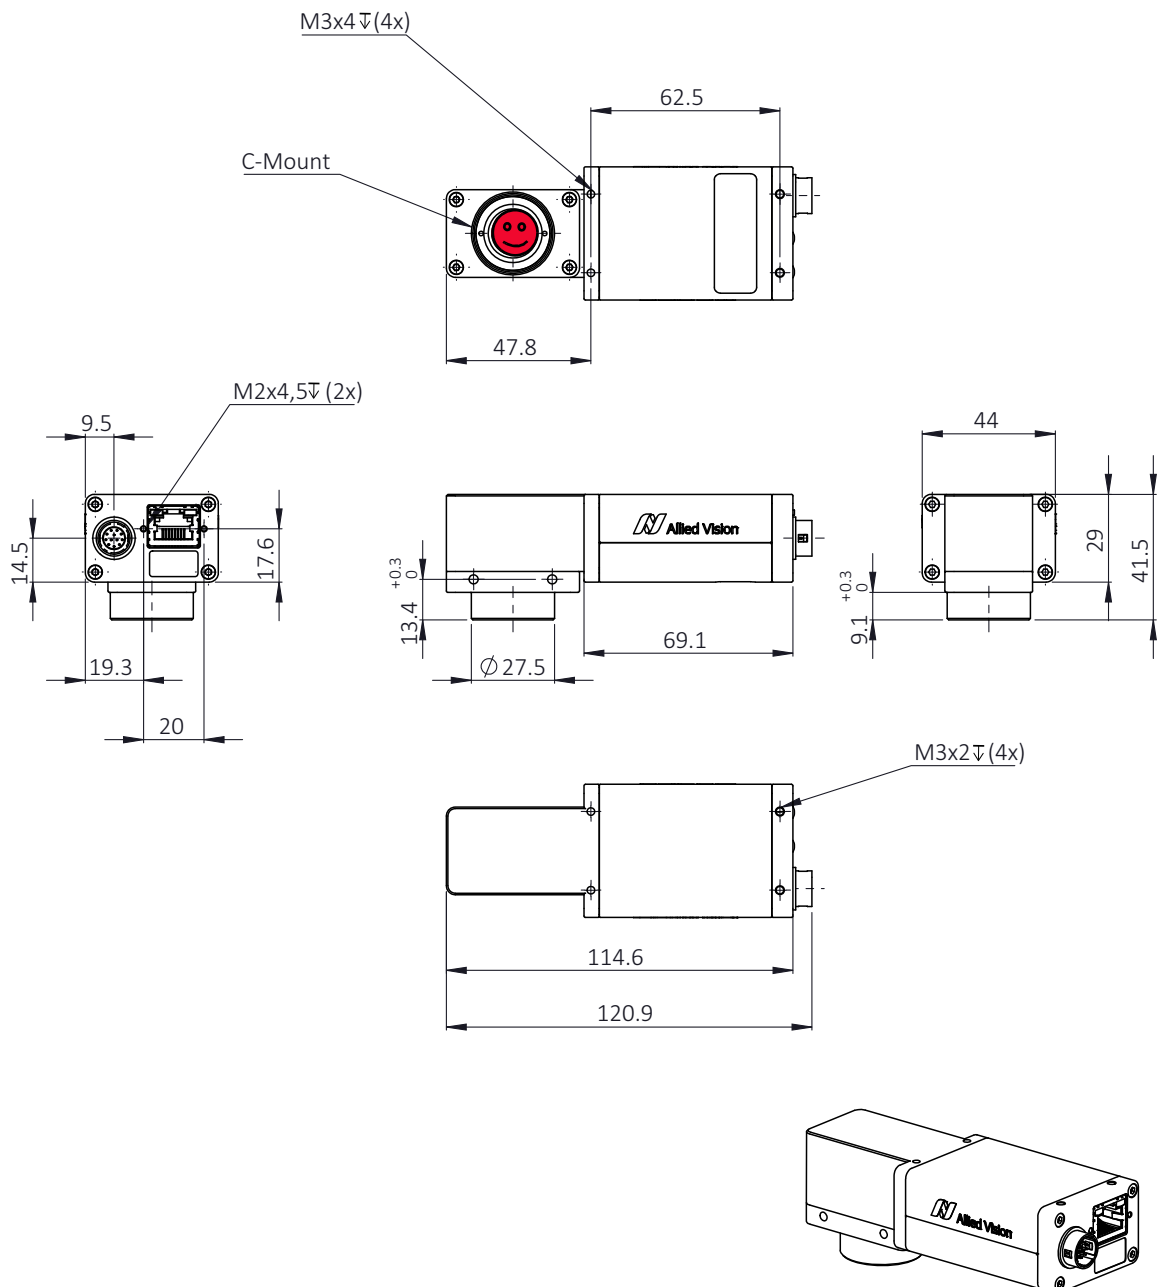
Manta type B W270 S90 housing dimensions (including connectors)
